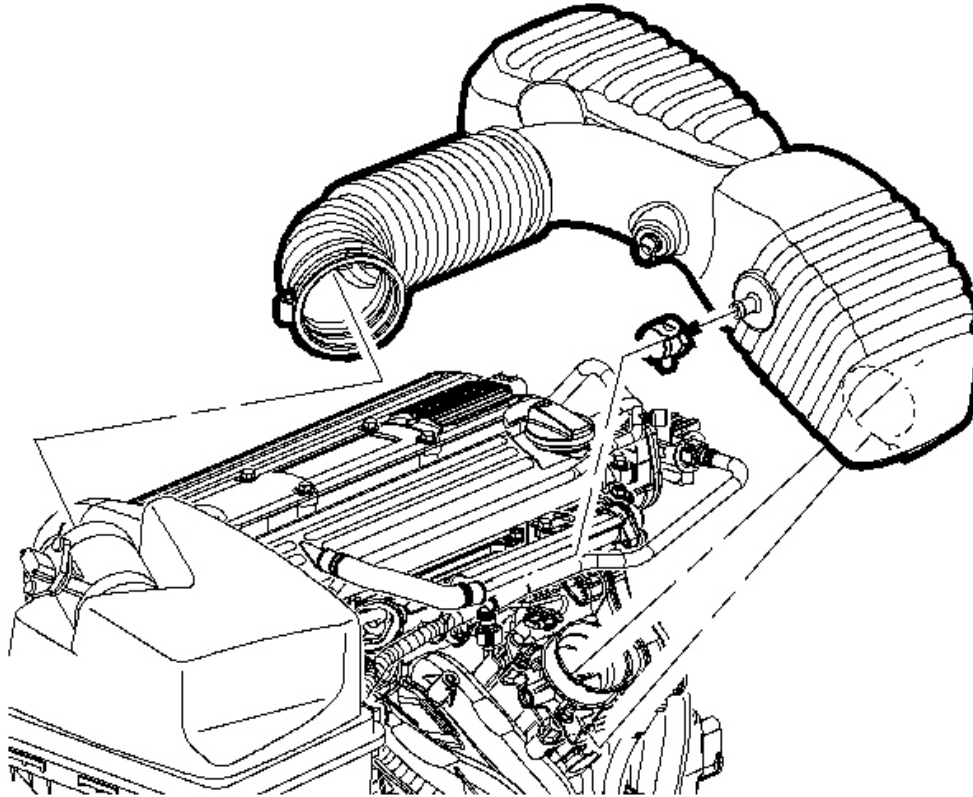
Positioning Outlet Resonator/Duct Assembly
